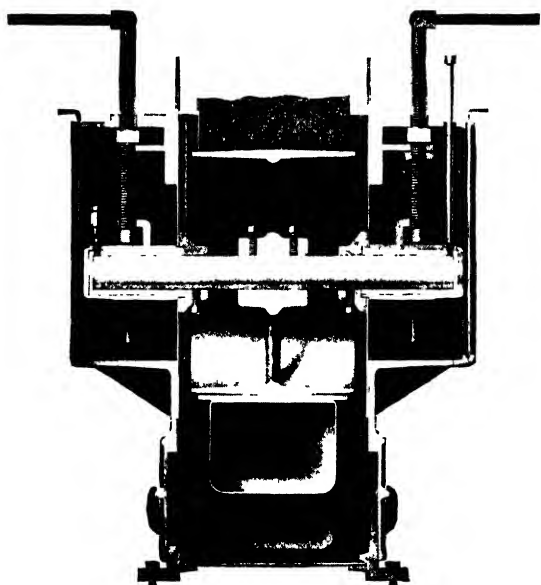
Take-up Boot with Outside Dust Seals.
